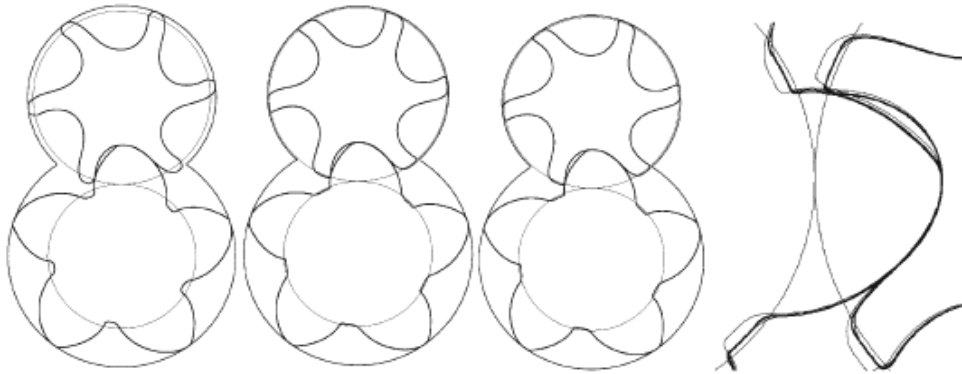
Rotor profiles optimized for oil-free and oil-flooded air and refrigeration compressor duty [21]
